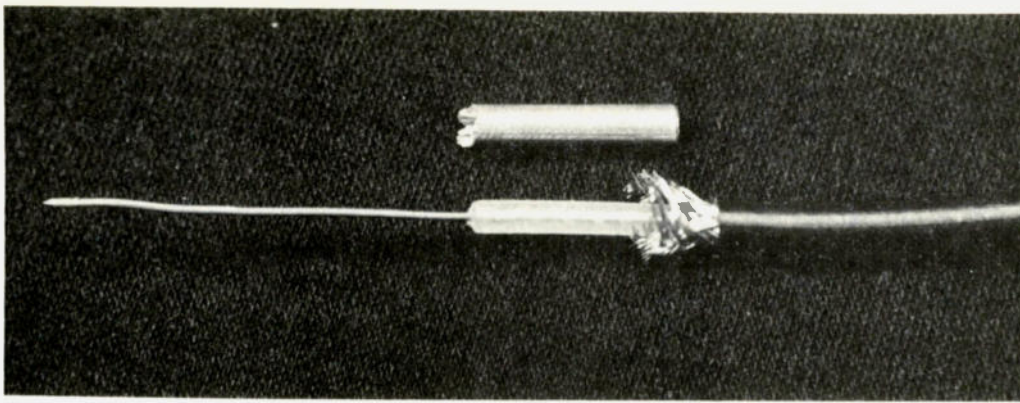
Photo B. Coaxial coupling cable and mounting ferrule before assembly.
